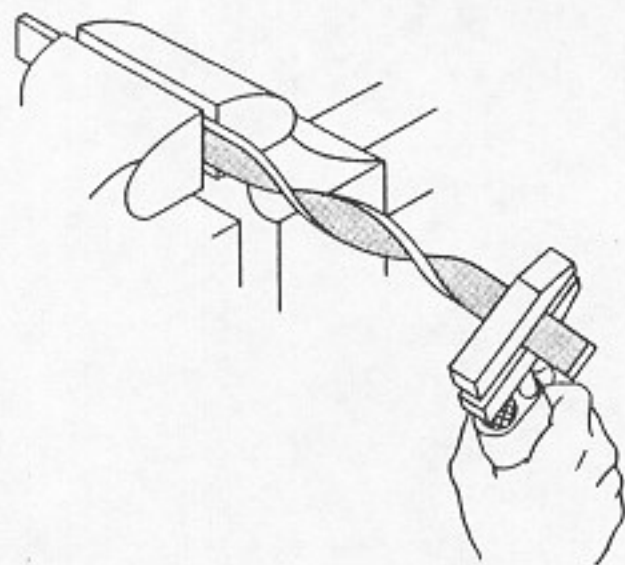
A ductile metal can be shaped by twisting, bending, or stretching without breaking or cracking and it will not spring back into its original shape.
